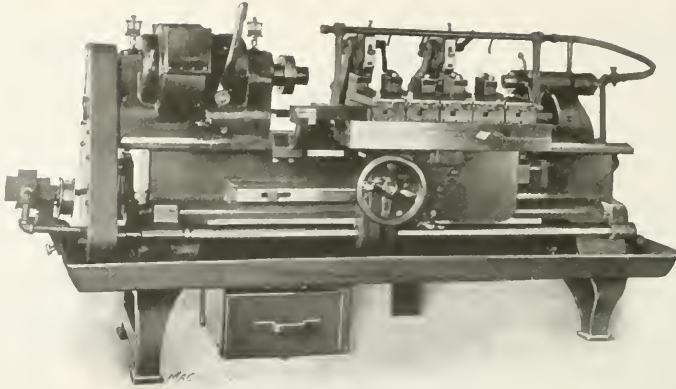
Multiple-tool Rifle Barrel Turning Machine
